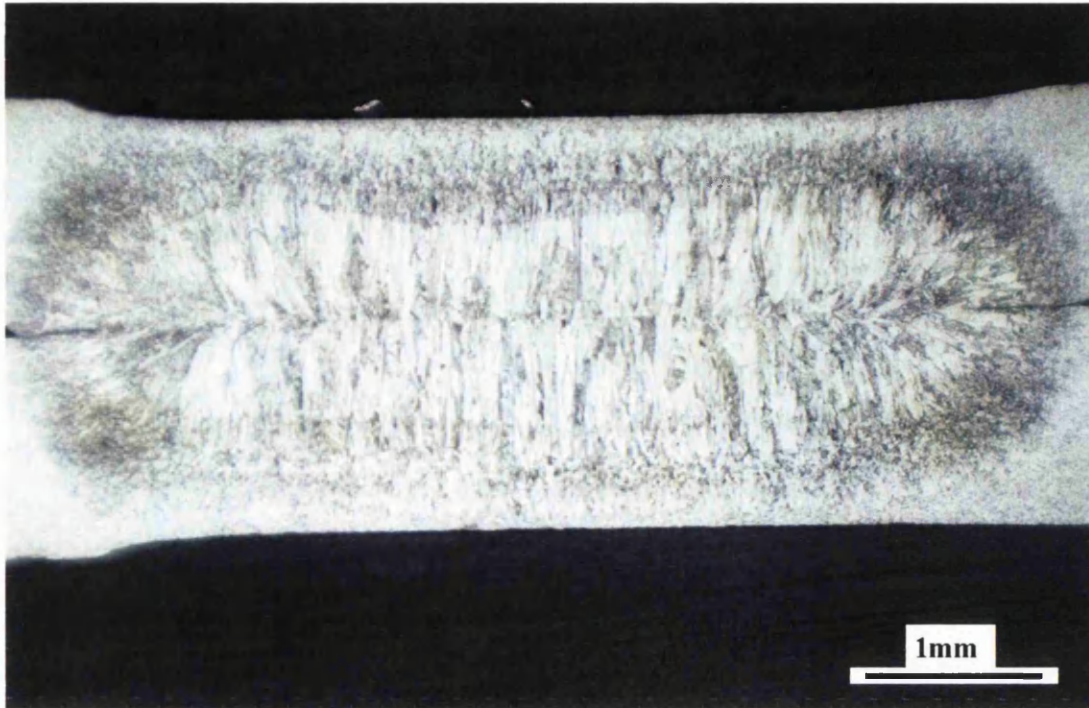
Macro of 5√f spot weld formed in 1.2mm IF260
